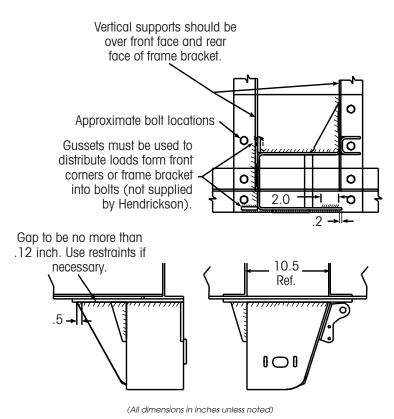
Frame bracket-to-mounting plate attachment (customer supplies bolt-on plate and gussets)
